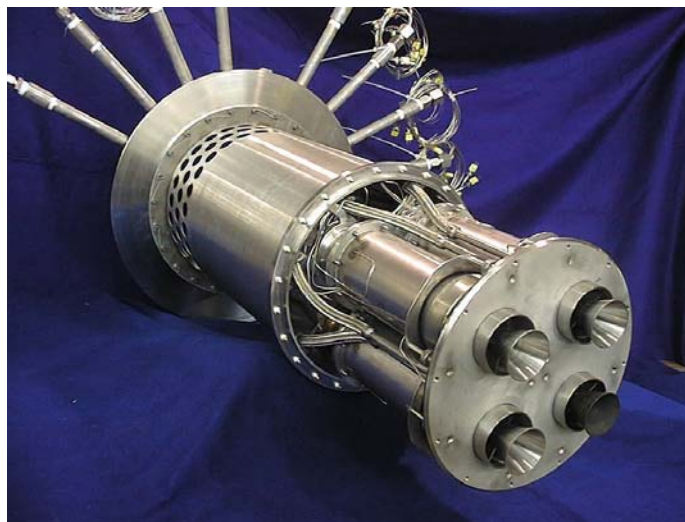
Photograph of four-RCL[®]-injector assembly, prior to installation in Saturn engine.
